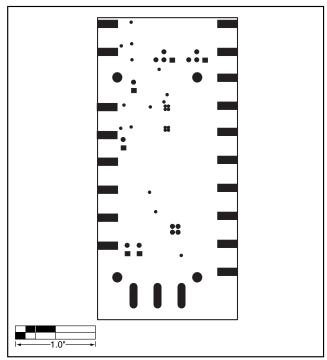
MAX3266 EV Kit PC Board Layout—Solder Side
